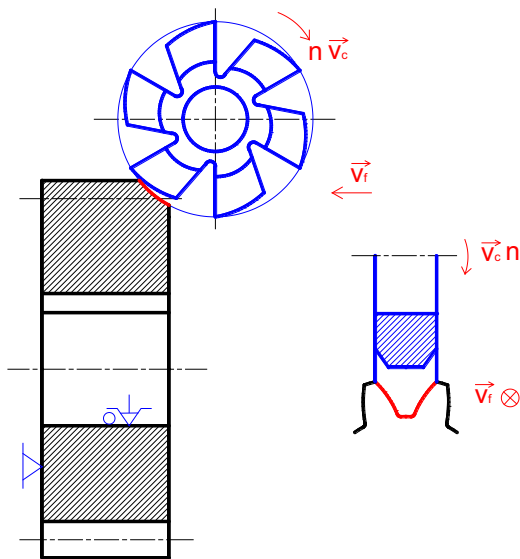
Manufacturing of spur gear by module disc milling cutter [3, with permission from Debrecen University Press]
